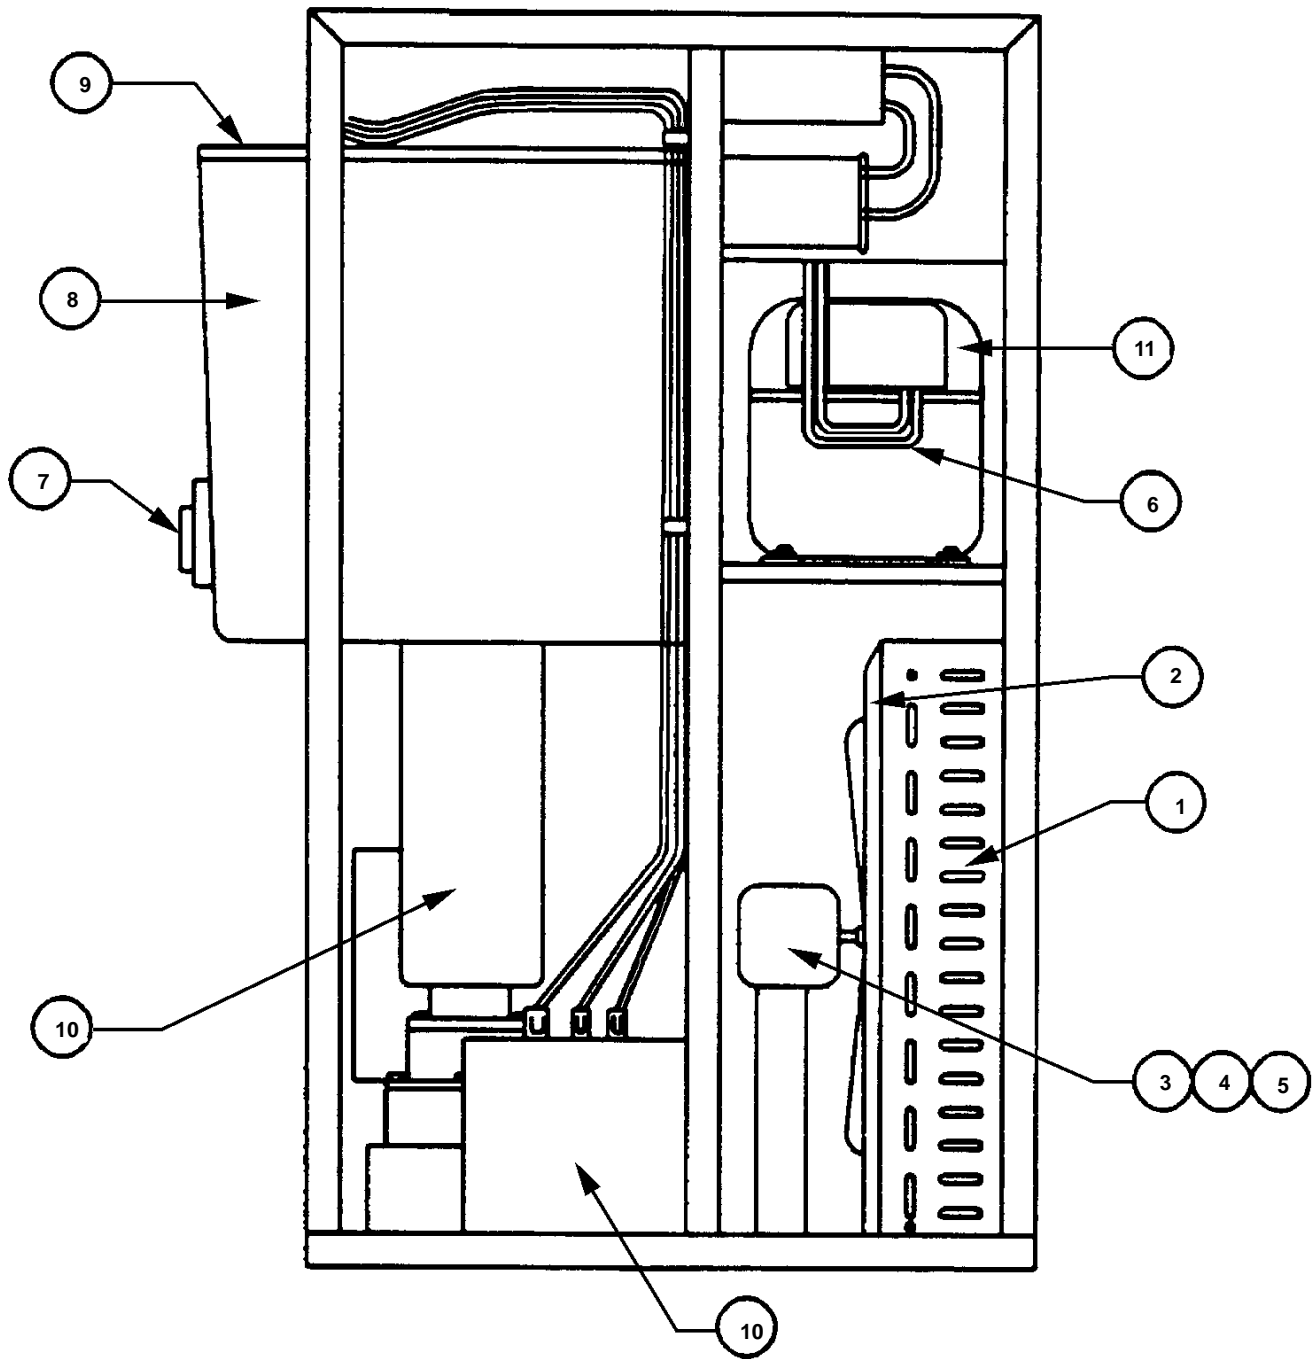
REFRIGERATION AND FRAME ASSEMBLY IMD 300-30 AND IMD 600-30
